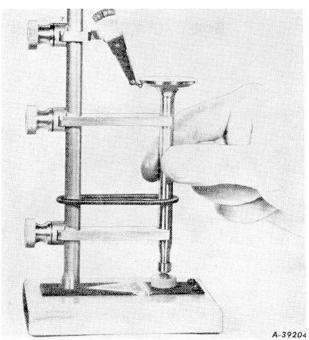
Checking Valve Stem Straightness and Face Run-Out.
